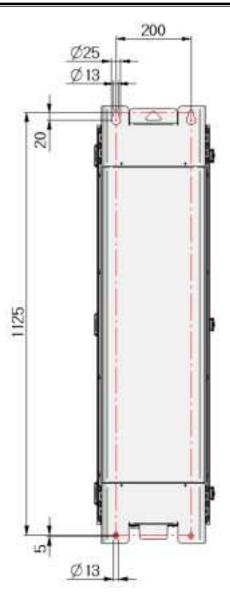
HROU Dimensions (Wall Mounting (mm))
